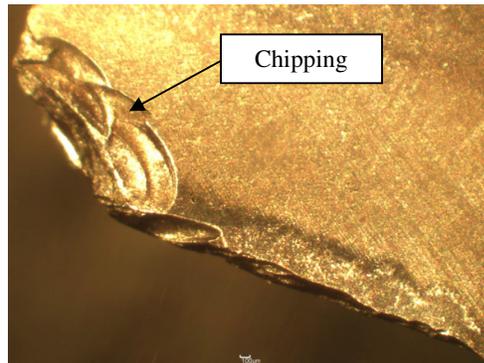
Tool rake for treatment 30 m/min and 0.15 mm/rev
